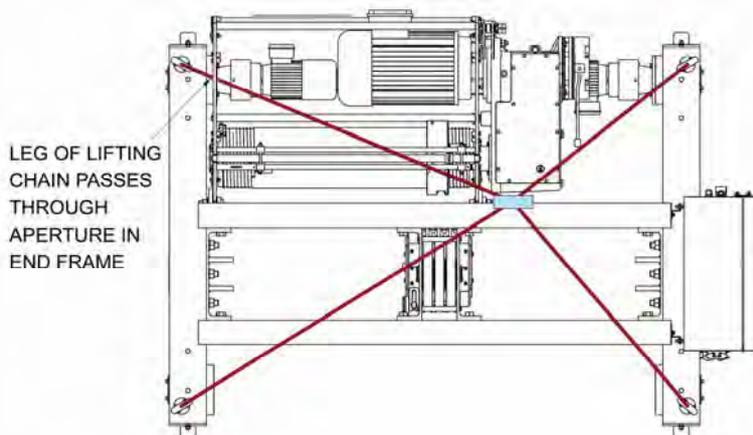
Lifting 6 & 8 fall Double Girder Crabs
